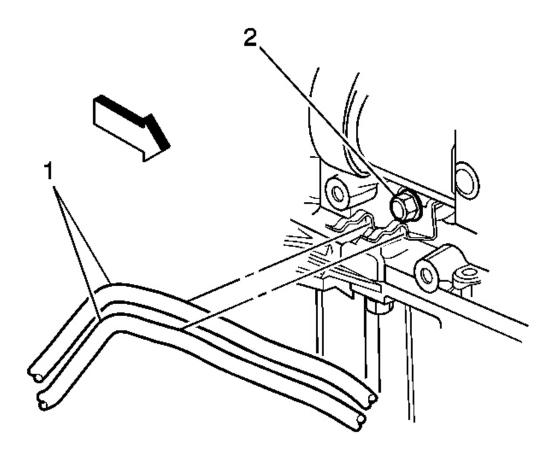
View Of Transmission Oil Cooler Pipe Bracket Bolt Courtesy of GENERAL MOTORS CORP.
